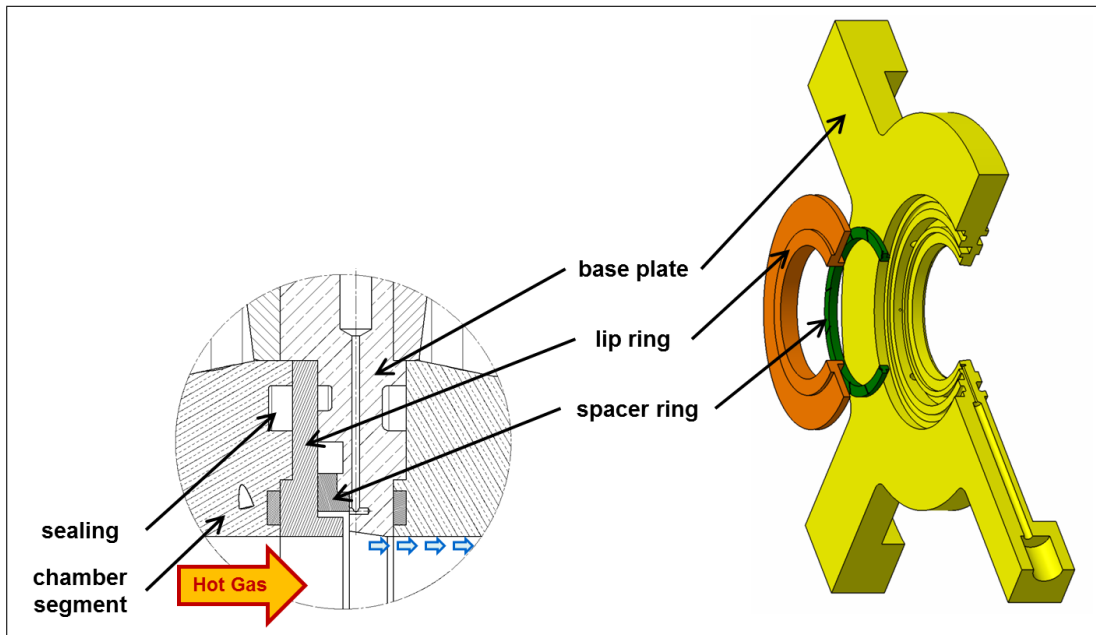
Film Applicator Details (Sketch and 3D Cut-Away)
